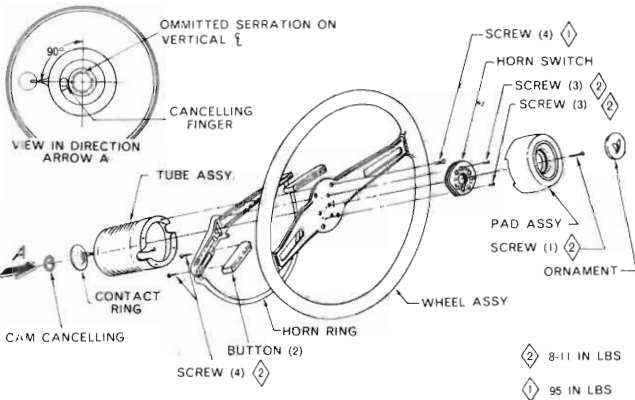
Steering Wheel Assembly Components (Typical Dissassembled View)
